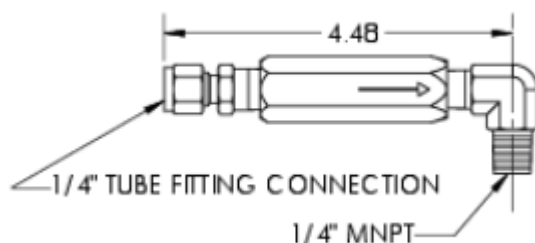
Angled Double Check Valve for compressor lube points.
